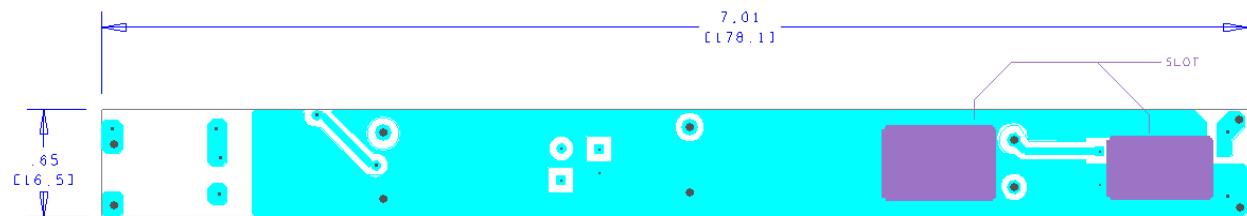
Printed Circuit Layout for D Package. Bottom View.
